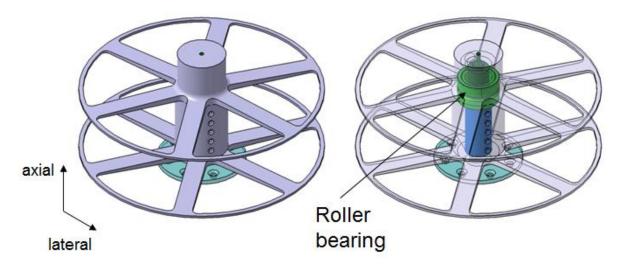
Auxiliary tether reel mechanism origin design with a roller bearing
